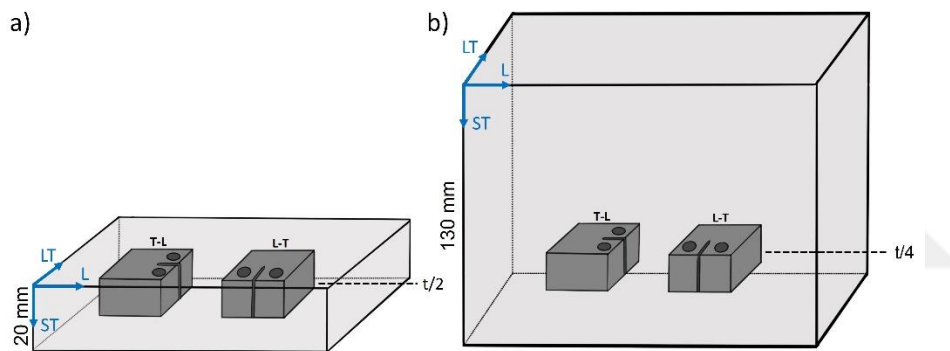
Schematic drawings showing the locations and orientations of CT samples extracted from a) 20 mm thick plate and b) 130 mm thick plate.
